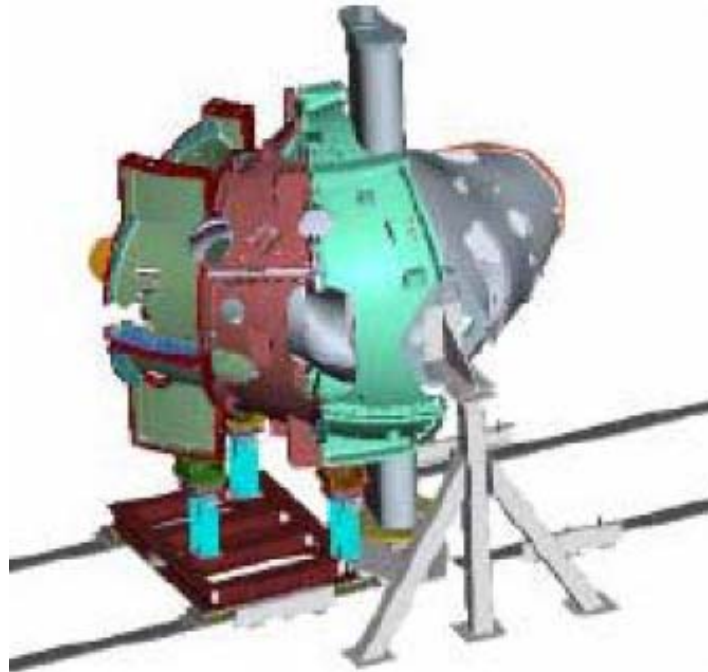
Half-field period assembly installed over vacuum vessel sub assembly
